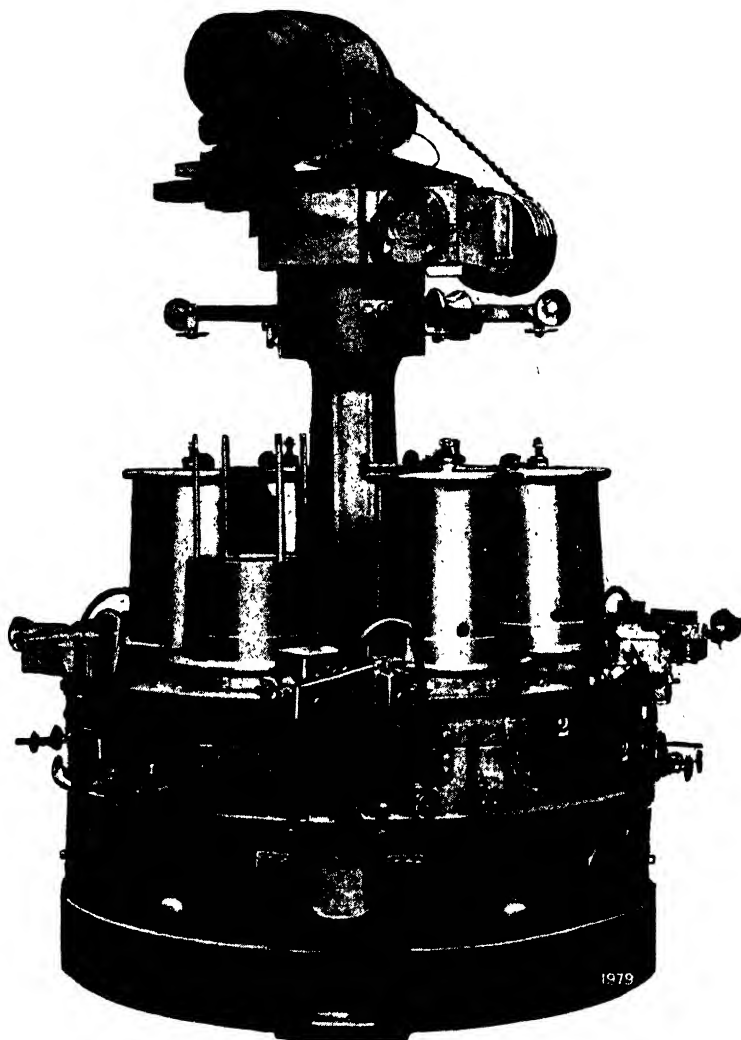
NON-SLIP WIRE-DRAWING MACHINE OF CIRCULAR TYPE
